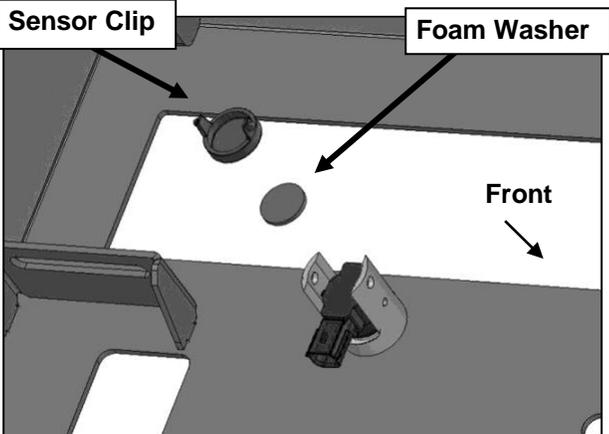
Push sensor plug into mounting sleeve. Use of 4mm Screws is optional
